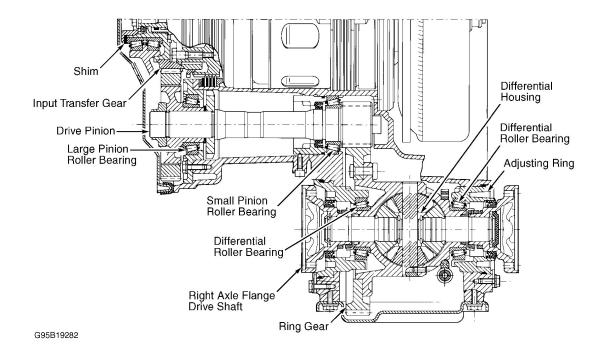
Locating Final Drive Roller Bearings, Races & Adjustment Shims (096 Shown; 098 Similar) Courtesy of VOLKSWAGEN UNITED STATES, INC.
